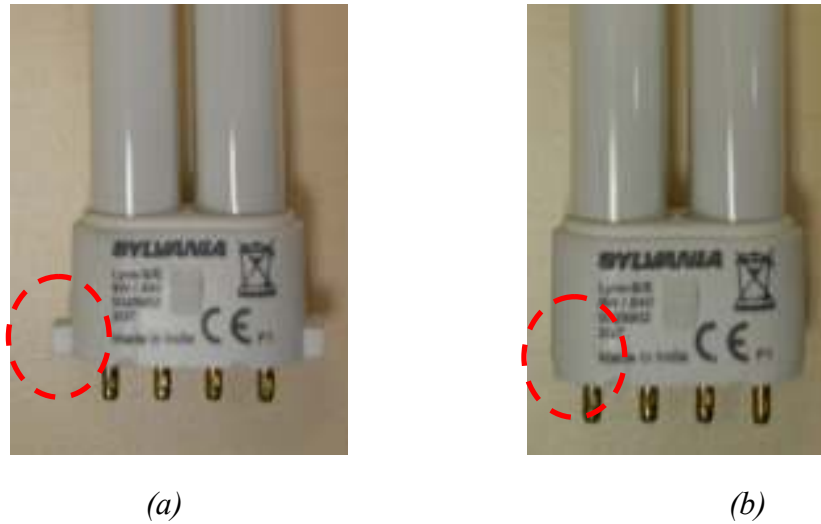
Photograph of the lower part of CFL (red circle) before and after physical modification. (a) Original shape. (b) Modified shape (5 mm of unnecessary parts were removed).
